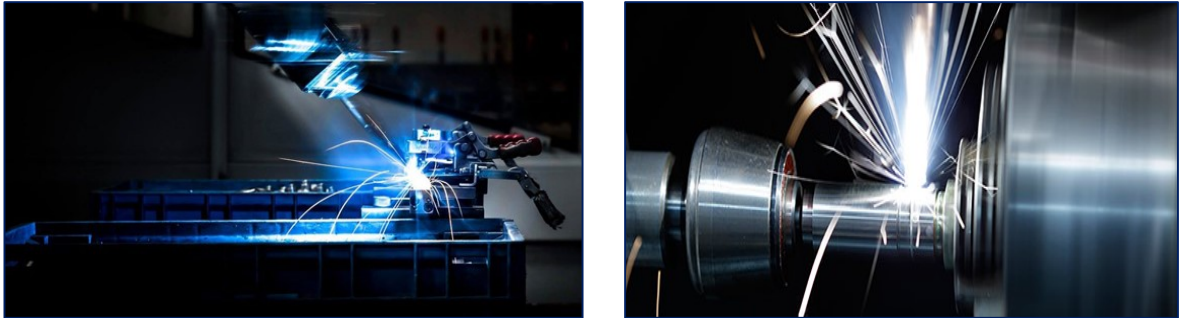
Laser Beam Welding [35] [36]
